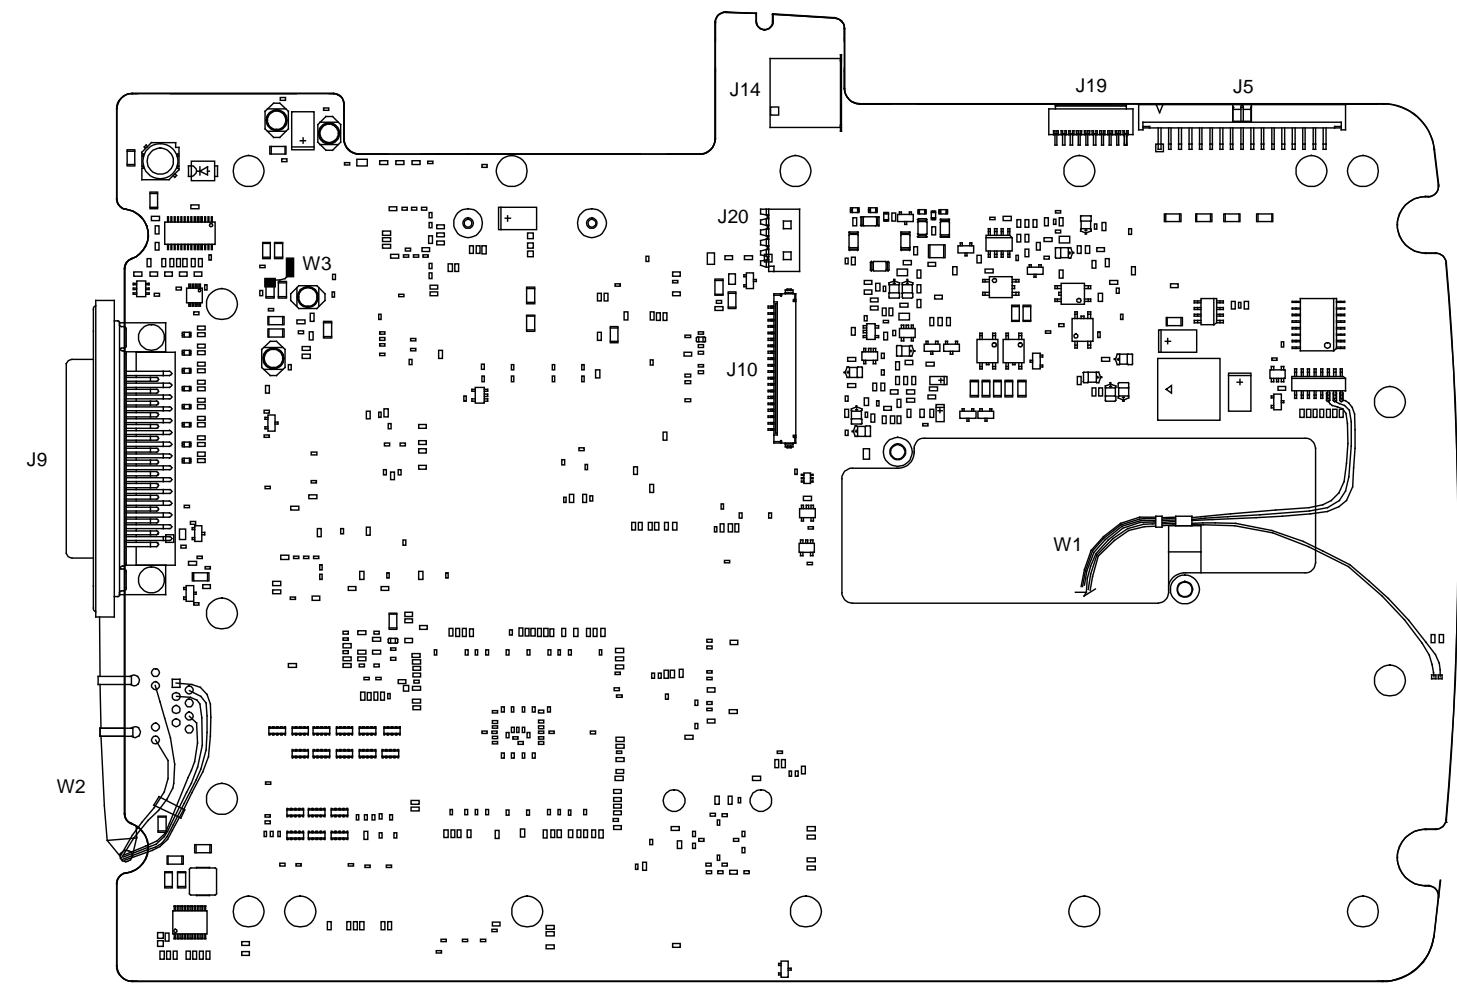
Front Chassis / Panel Assy (Sheet 6 of 6)
